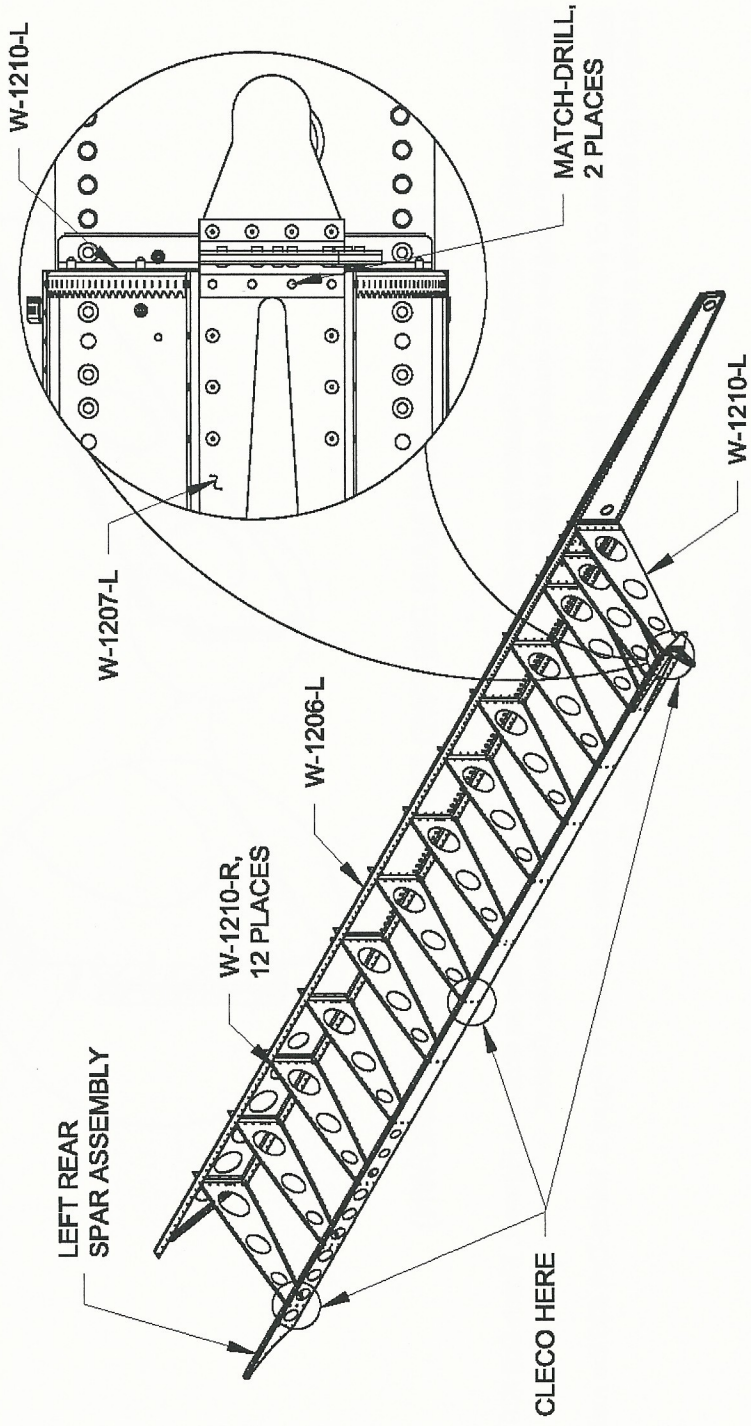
MATCH-DRILLING MAIN RIB AFT FLANGE
